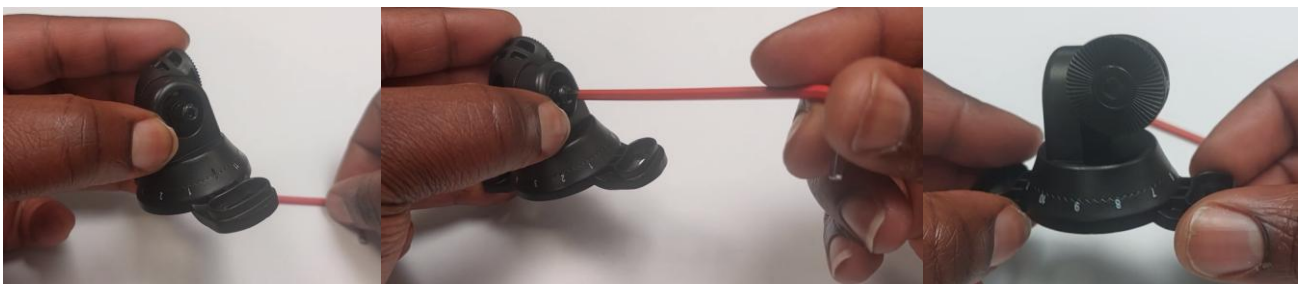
A-Pillar Mounting bracket, fixing the top piece to the middle piece with the second hex head screw using the hex key
